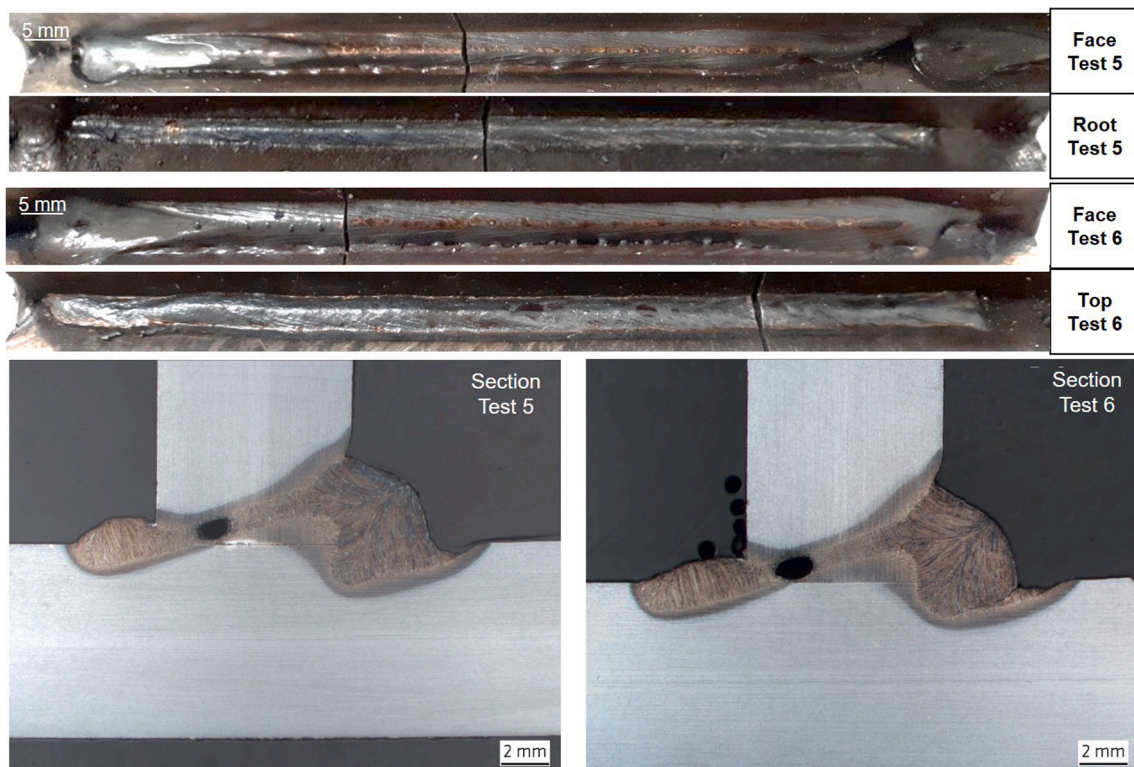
Macrographic images of face and root sides, and cross sections of HLAW welds obtained in Tests 5 and 6.
